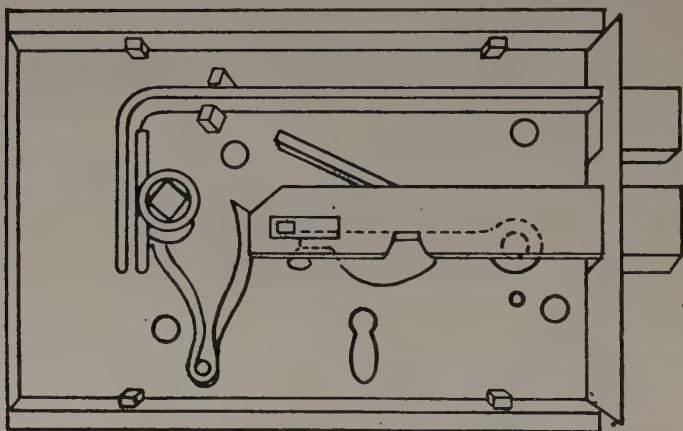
FIG. II.—SECTIONAL VIEW OF RIM LOCK.
